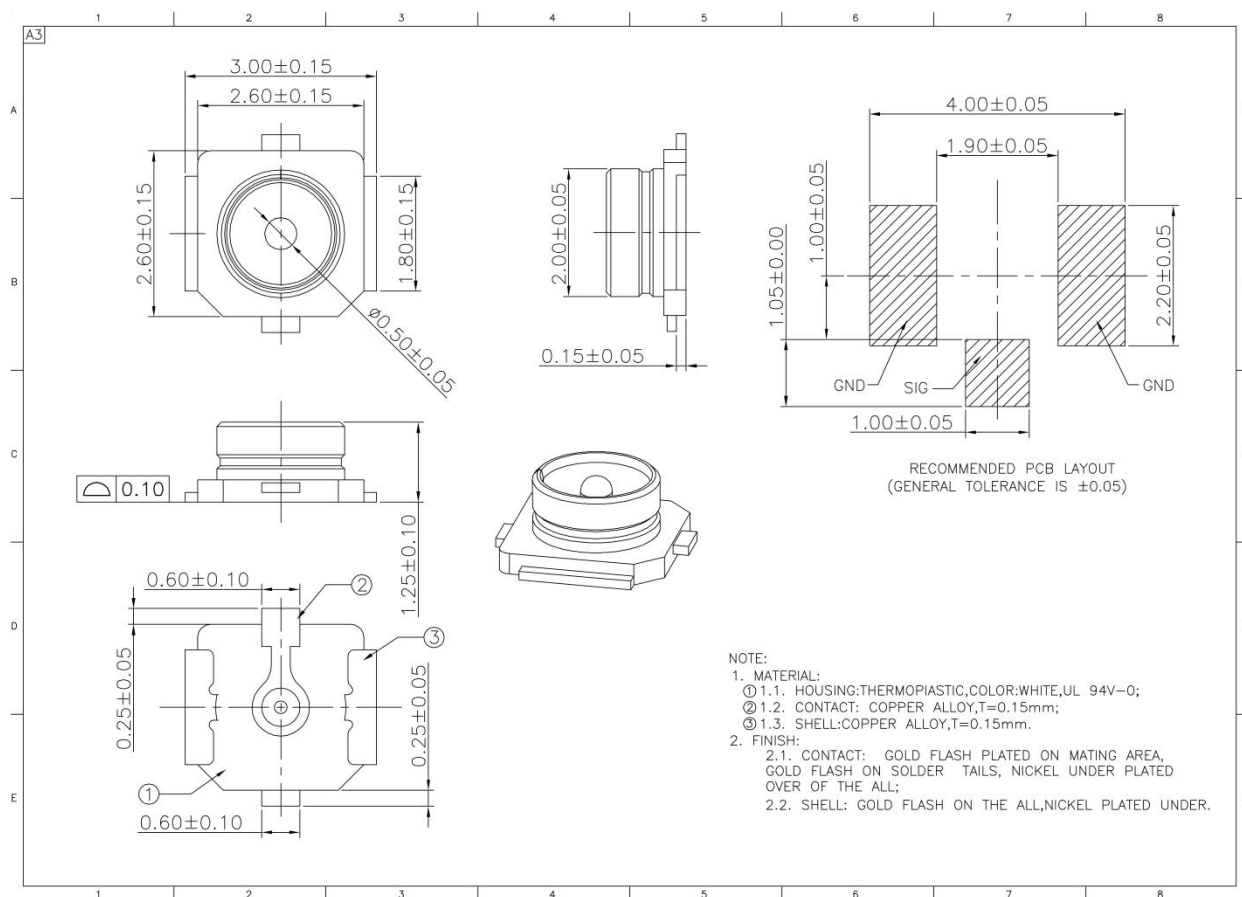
External Antenna Connector Dimensions (Unit: mm)
